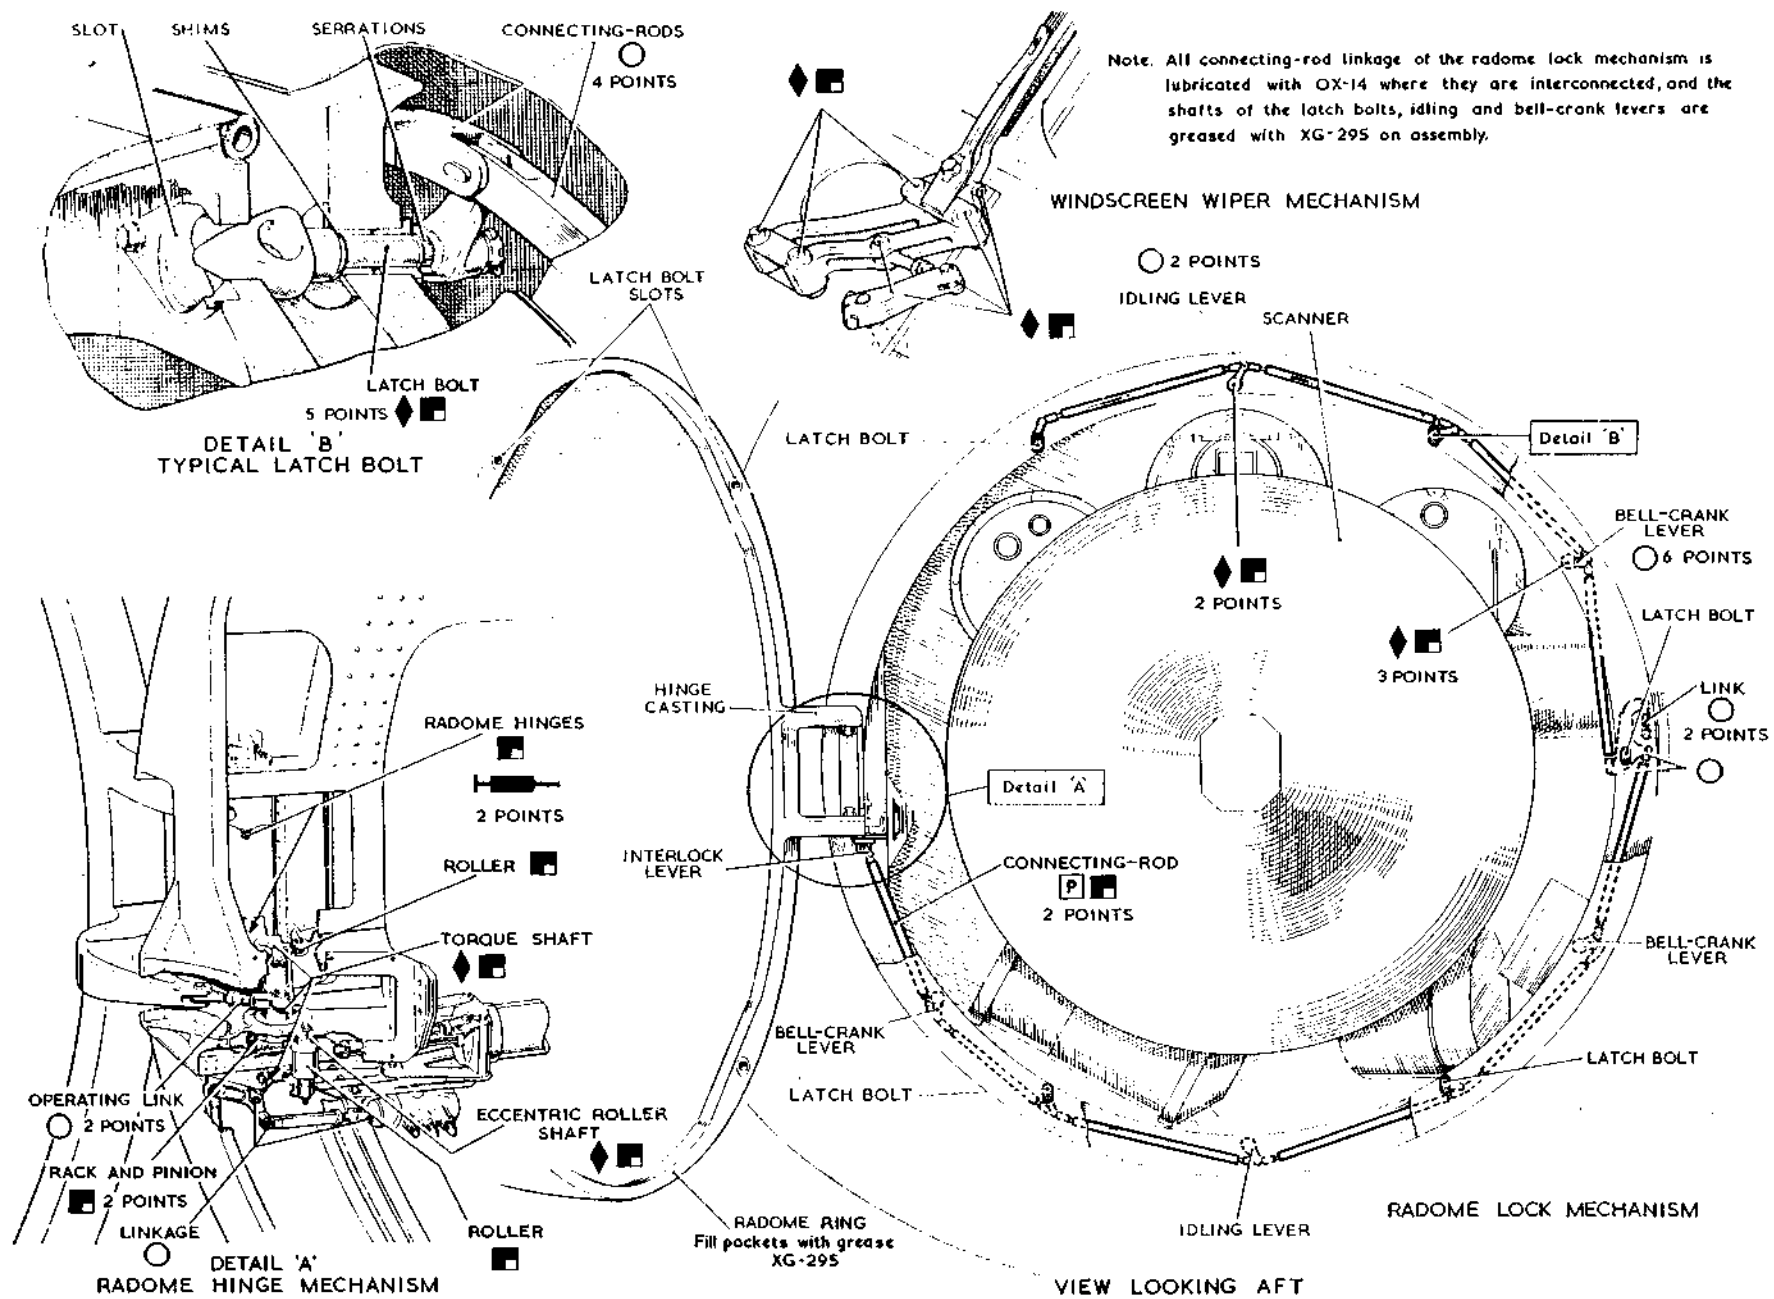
Lubrication—radome lock and hinge mechanism and windscreen wiper
